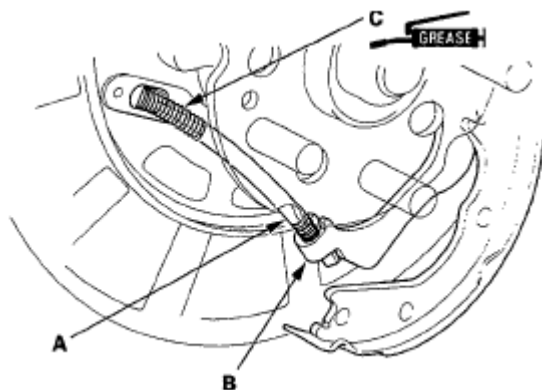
Identifying Parking Brake Cable And Parking Brake Lever
